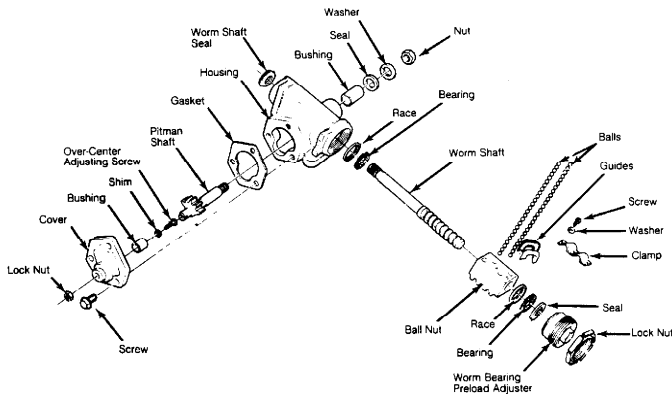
Exploded View of Saginaw Model 525 Steering Gear (Typical)
